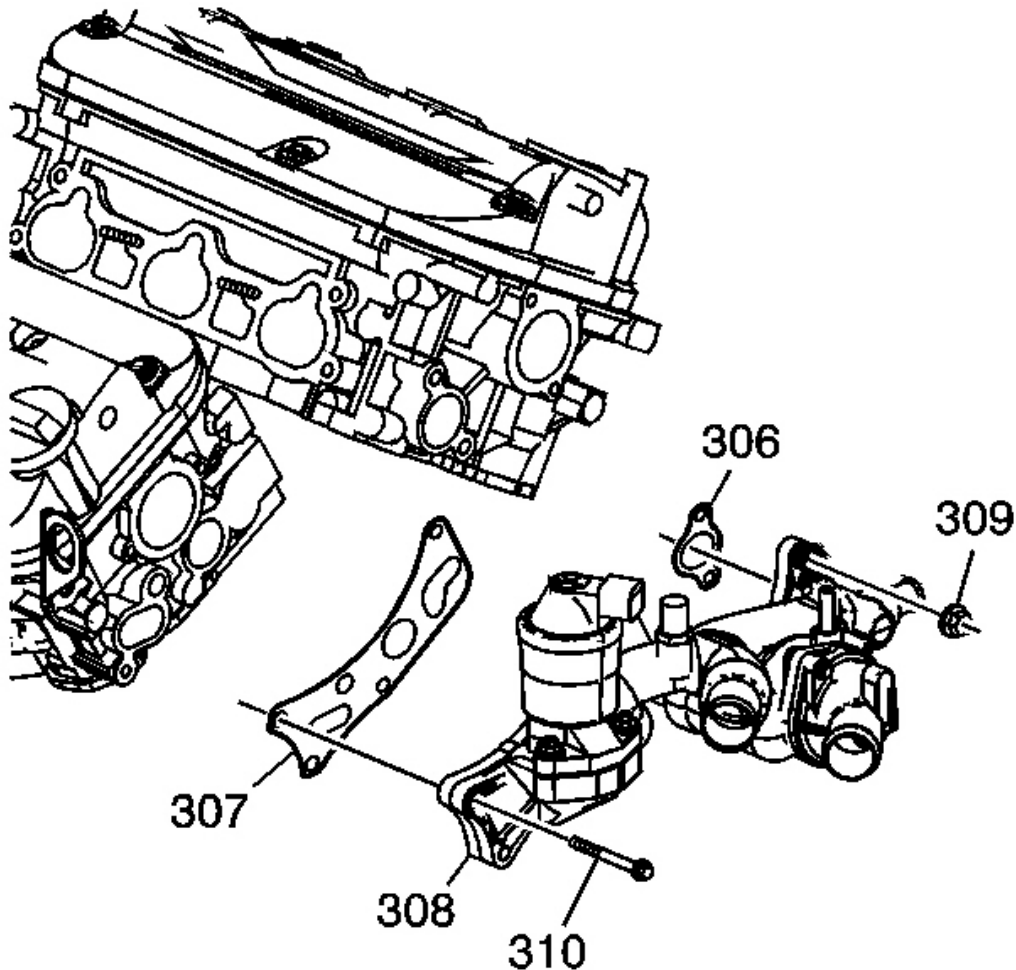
View Of Gaskets, Housing, Bolts & Nuts
